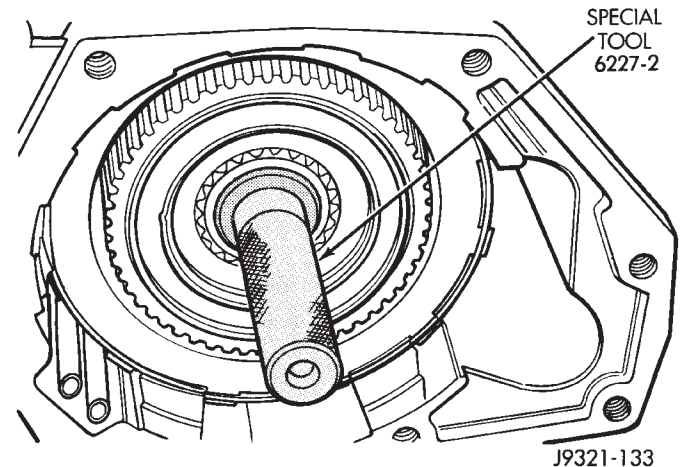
Checking Alignment Of Overdrive Planetary Gear And Overrunning Clutch Splines
